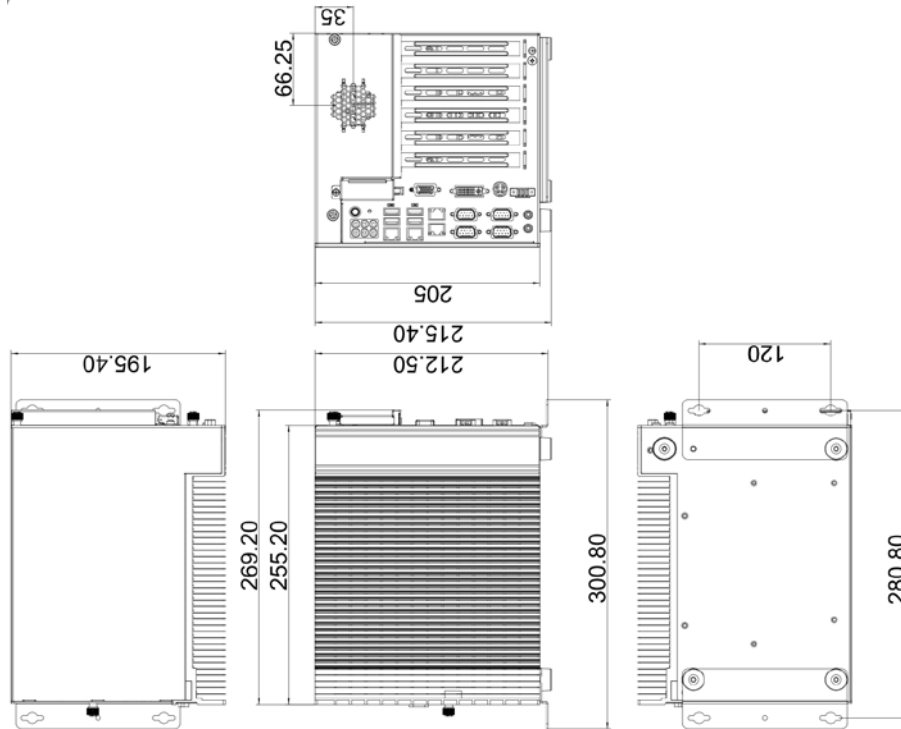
6-slot TANK-860-HM86 Physical Dimensions (millimeters)
